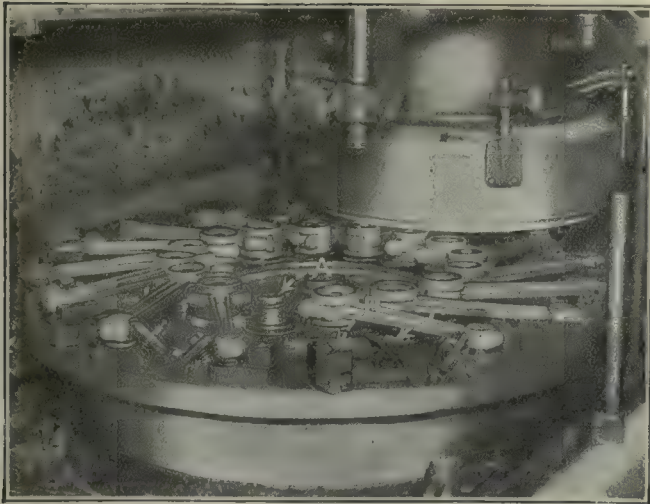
GRINDING THE SIDES OF THE ROD BEARINGS
